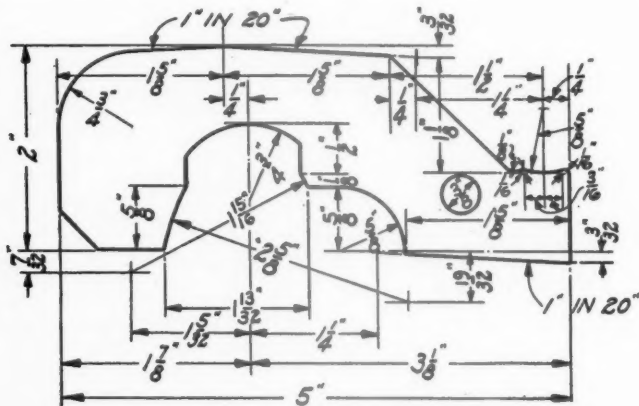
Proposed maximum flange gage for reinforced flange cast iron wheels
